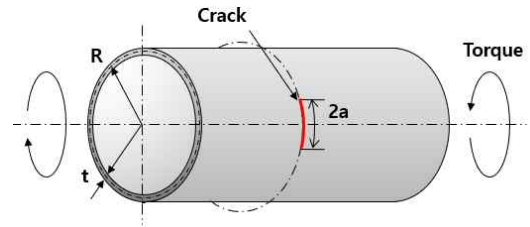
Hollow Shaft Model of the Power Transmission Shaft
